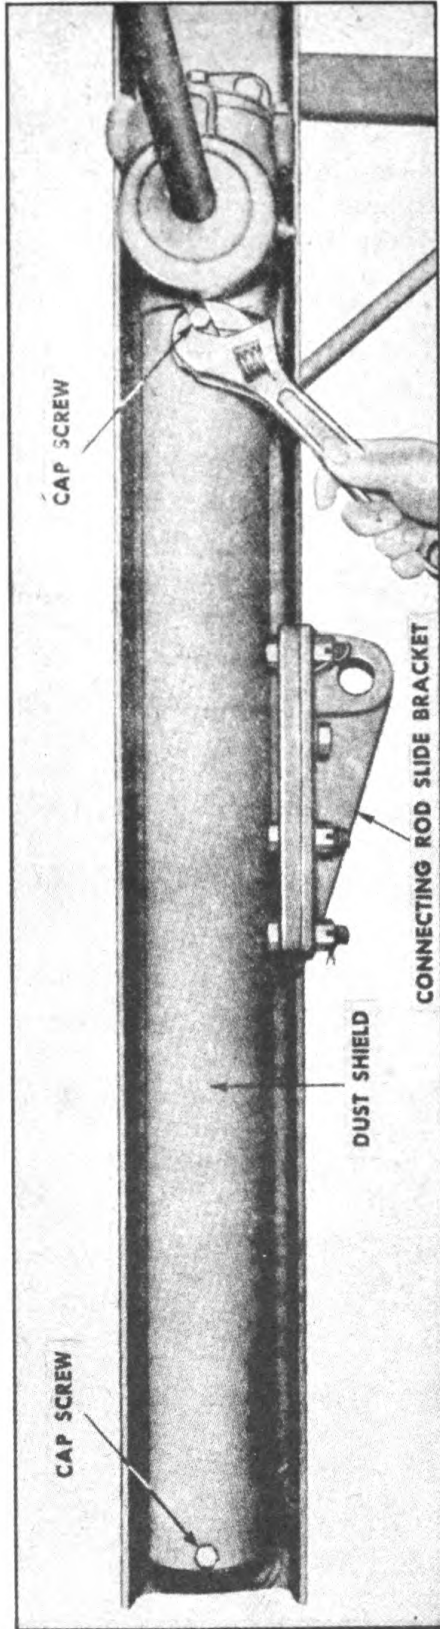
REMOVING FRONT RISER GEAR HOUSING
